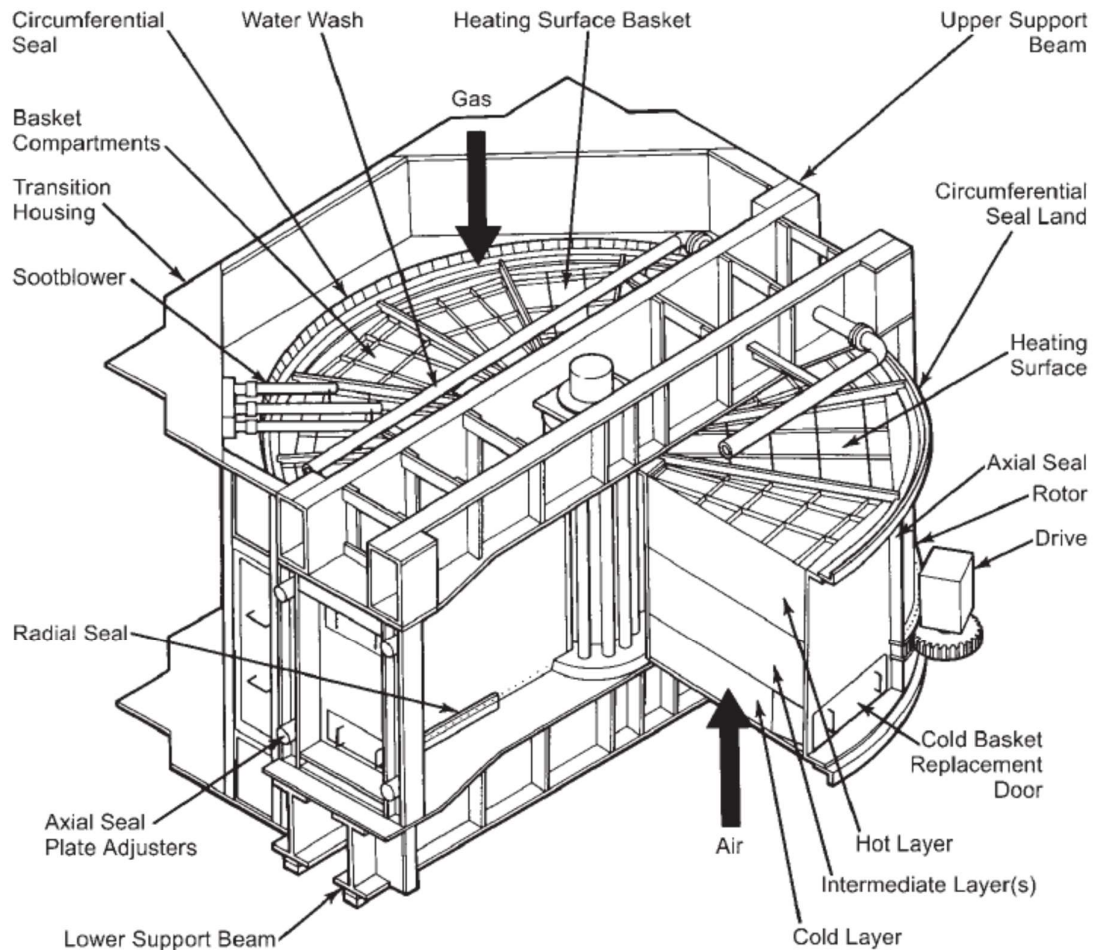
Vertical shaft Ljungström air heater exploded view (Kitto,2005)
